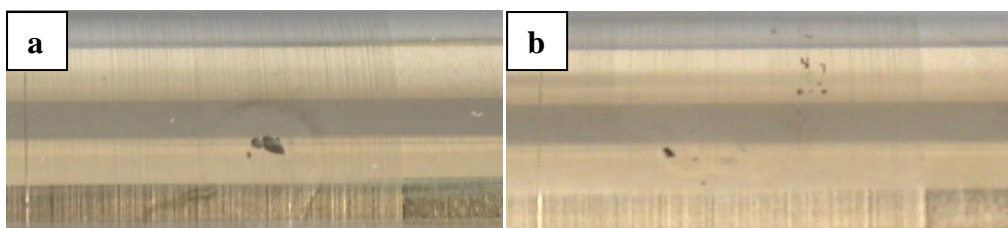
Corrosion flaws under the crevice former (a) and dry salt patches (b)
